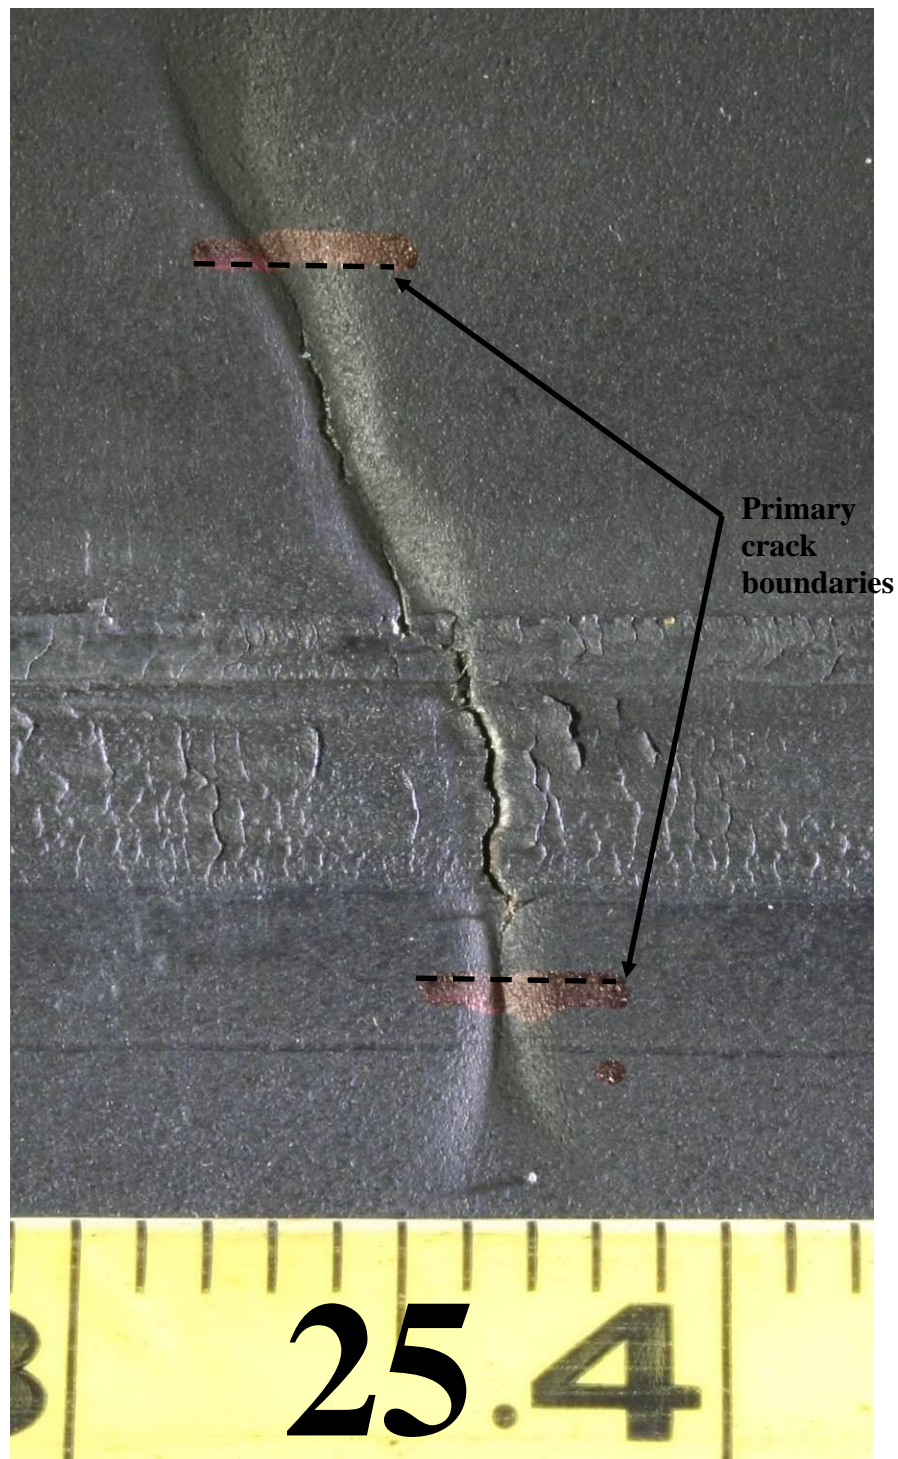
Photograph of the internal pipe surface at the leak location (Crack Colony 4). The tape measure indicates the distance from the U/S girth weld.
